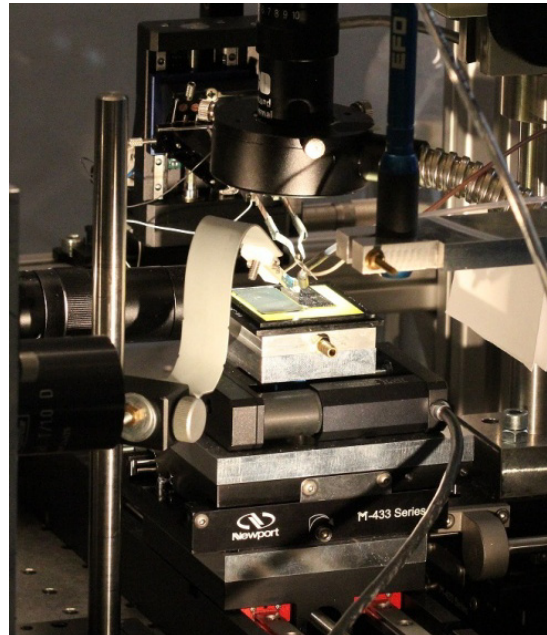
The microassembly system used to carry out self-alignment tests [4].
